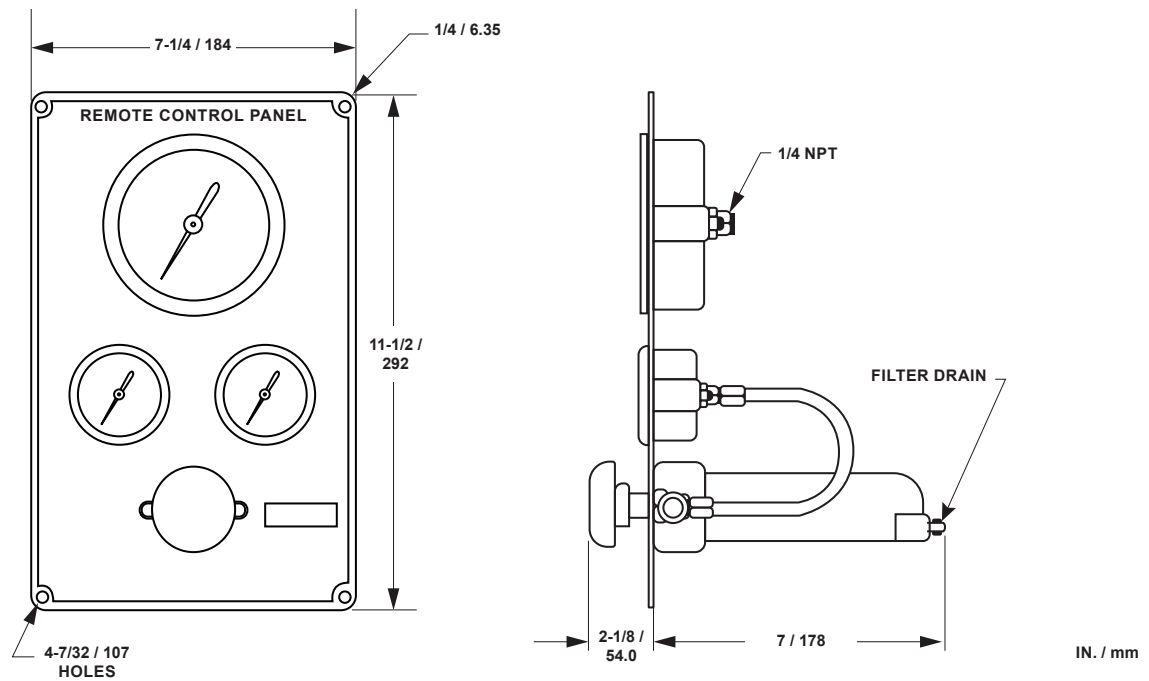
Type B Panel (cut out 10-1/4 in. high by 6 in. wide)
